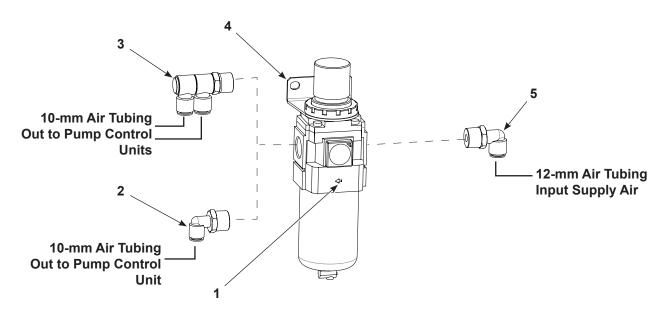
Air Filter Installation - Standalone and Rail/Wall Mount Systems
